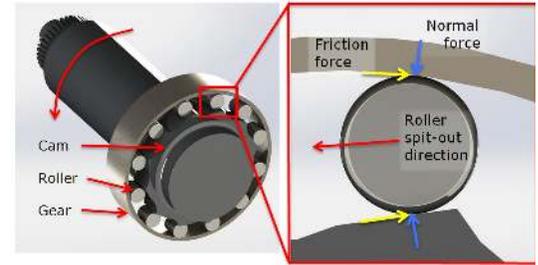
Left: The engine turns the cam causing the cam flats to pinch the rollers against the inside of a gear. That gear drives the main gearbox and ultimately the rotor. Right: If the coefficient of friction is less than 0.06 then the roller will spit out and the freewheel can disengage.
